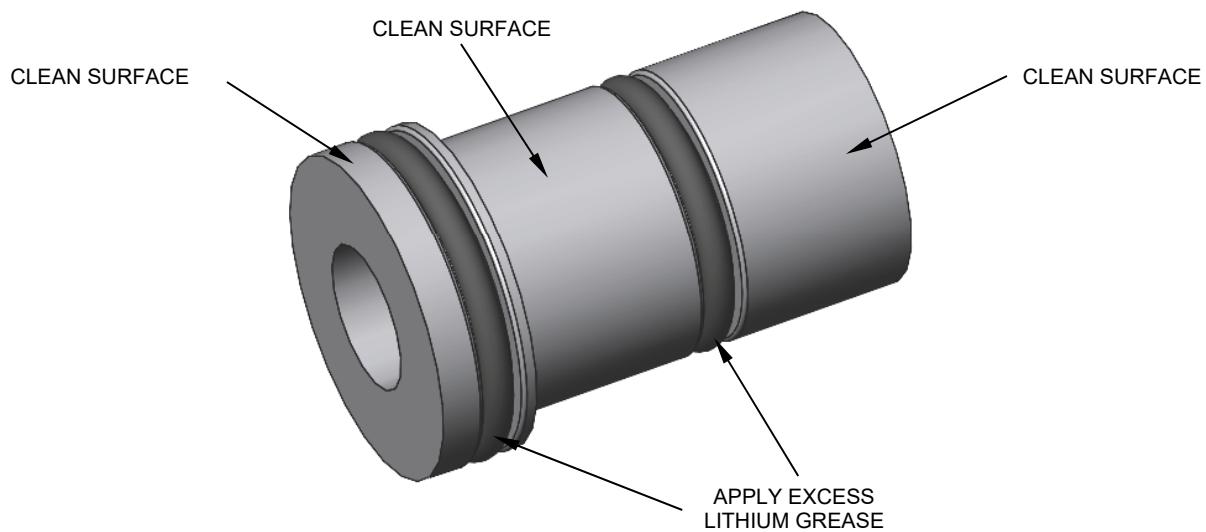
C – STEP 3 – Clean all O-ring contact surfaces and the bottom surface of the outlet housing. Apply excess lithium O-ring grease to inside of both housings.
